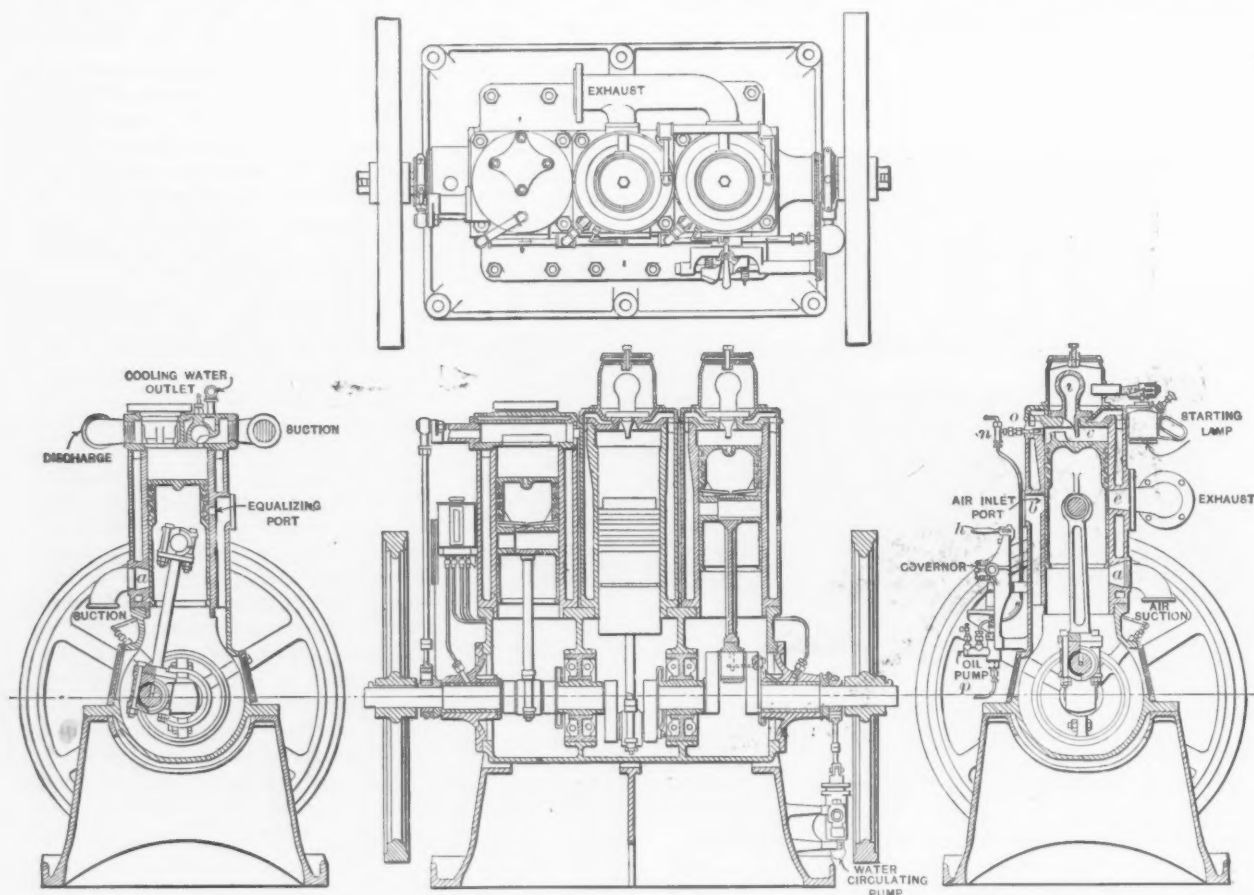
Top View and Sectional Elevations of a Mietz & Weiss Combined Air Compressor and Two-Cylinder Oil Engine.
